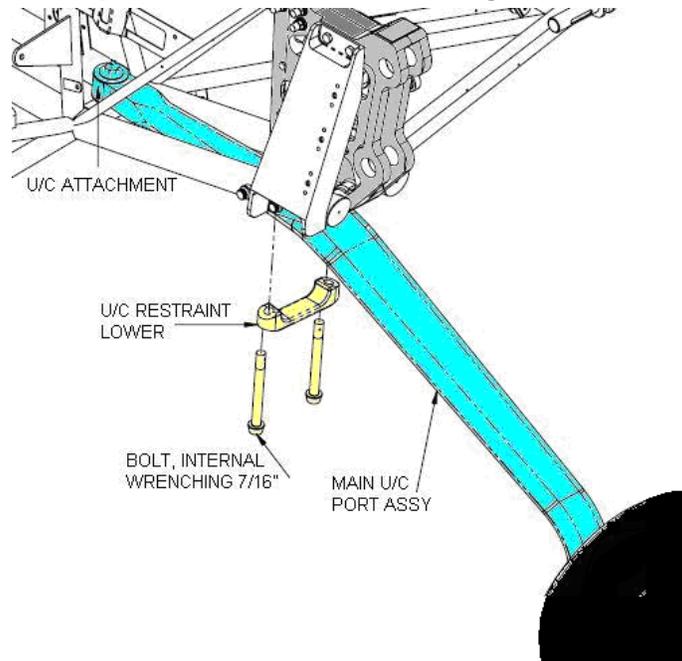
Main Landing Gear Port Attachment Bolt and undercarriage Restraint Lower (Saddle)
